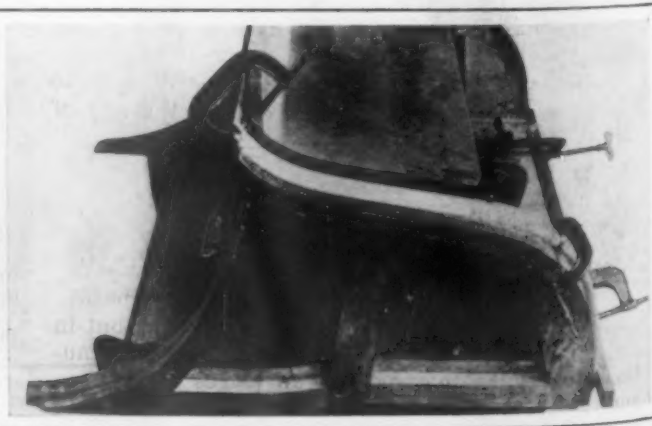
Aluminum Sheets of Roadster Rear Boot Clamped in Position for Welding
